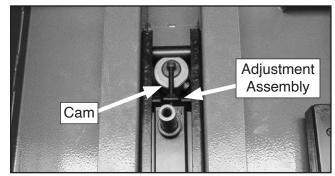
Lubrication locations for tension adjustment assembly (wheel removed for clarity).
